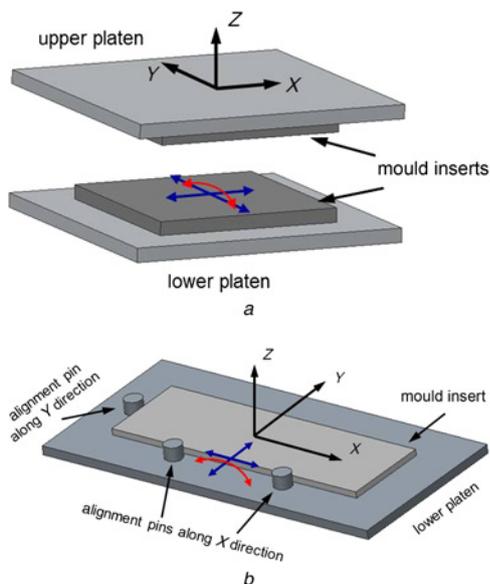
Schematic representation of tool setup for double-sided hot embossing (Fig. 1a), and alignment of complementary mould insert with respect to top mould insert on upper platen (Fig. 1b)
